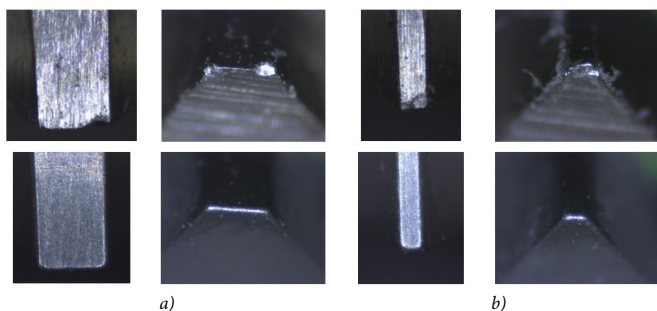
Thread tap teeth before (the upper row) and after (the lower row) magnetic-abrasive finishing: a and b) the 4th tooth at the inlet section; c and d) the 6th tooth at the calibrating section
